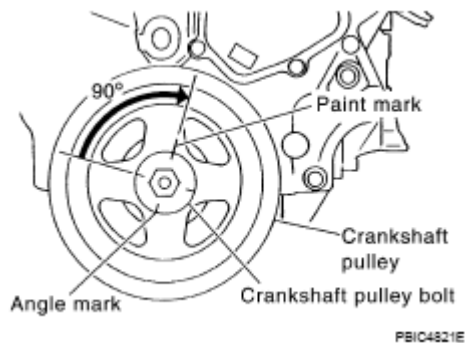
Tightening Crankshaft Pulley Bolt An Additional 90°
